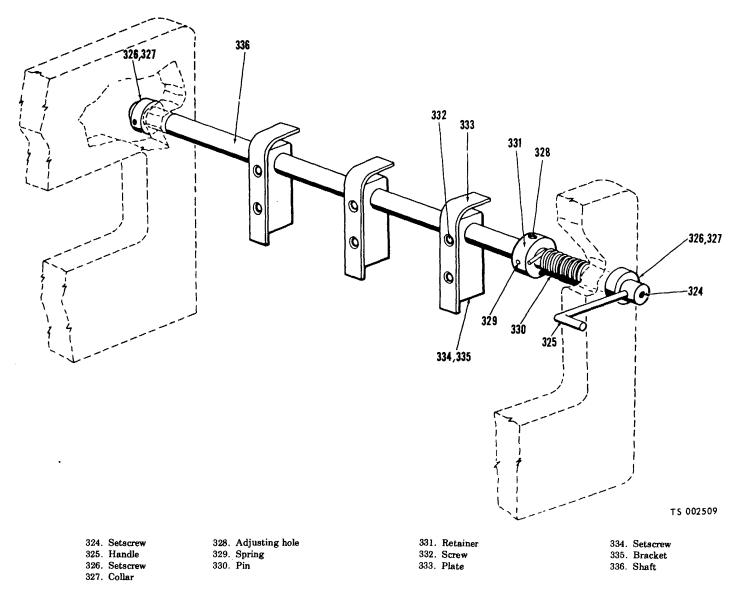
Slowdown sheeter alignment assembly (Sheet 6 of 7). 4-111
